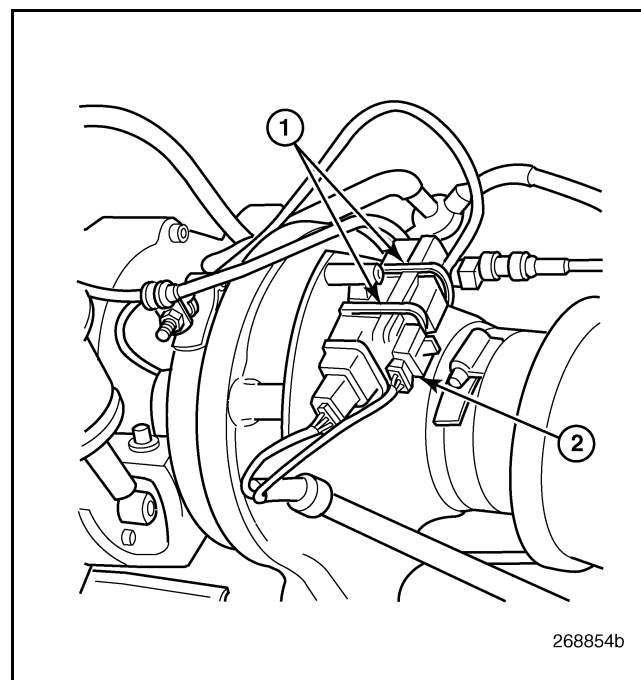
Turbocharger Wheel Speed Sensor Connector Mounting
